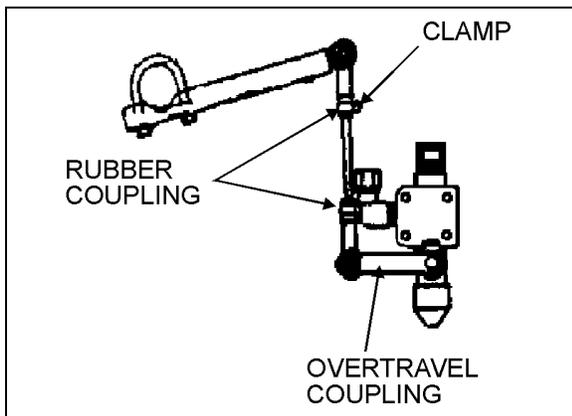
FRONT HEIGHT CONTROL VALVE 16059
